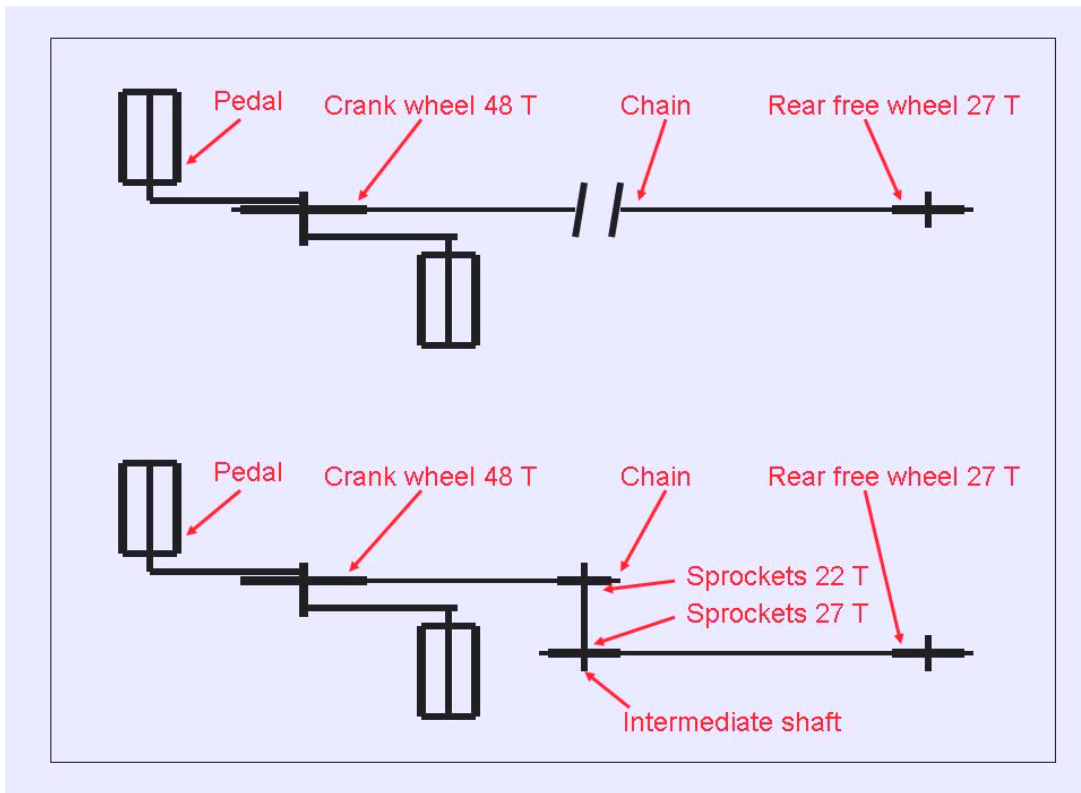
Schematic diagram of layout of gears and pinions for gear reduction
